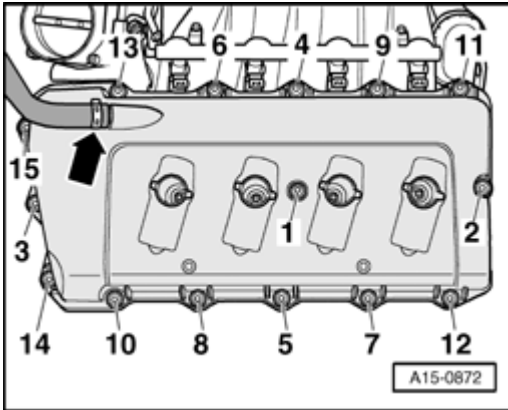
Disconnecting Hose Of Crankshaft Housing Ventilation & Removing Right Cylinder Head Cover Screws In Sequence
